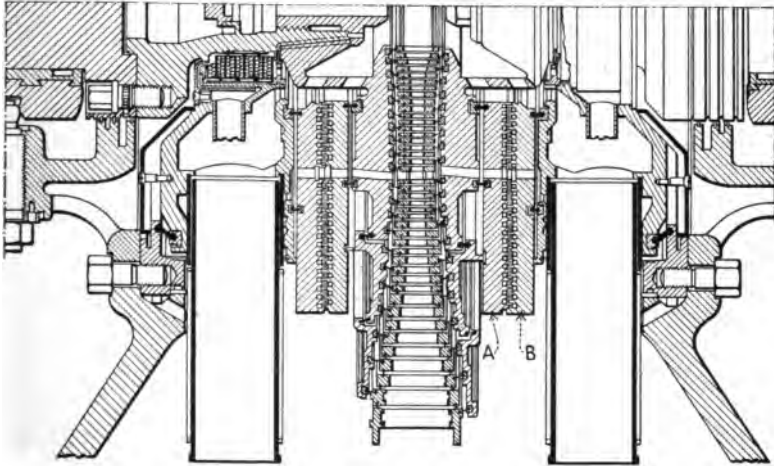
Wulsty Castle*: Longitudinal Section of 1,000 Kilowatt Turbine, Lower Part
